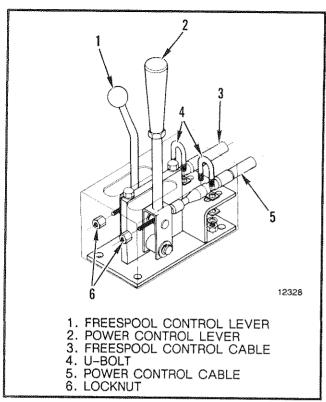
CONTROL CABLE ADJUST-MENTS
